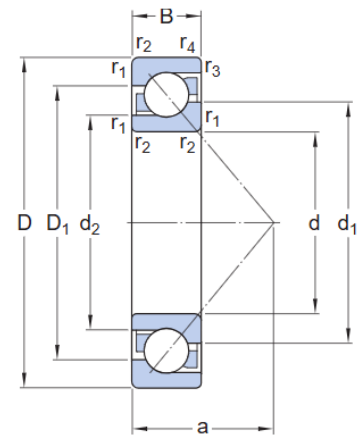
Dimensions of SKF 7211 BECBP bearing
